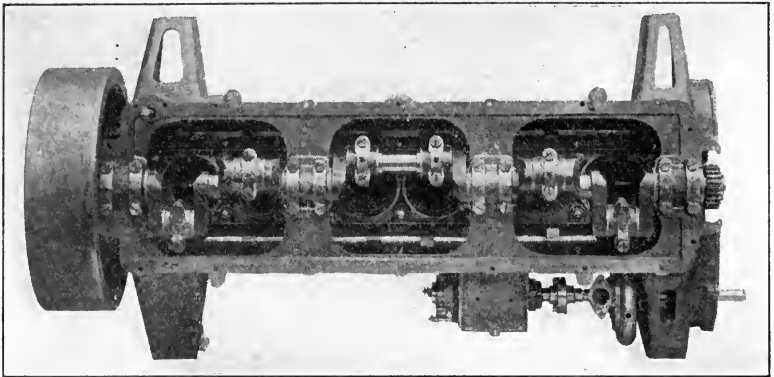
Bottom View of Premier Engine Showing Four-Bearing, Six-Cylinder Crank Shaft with Connecting Rods in Place.
